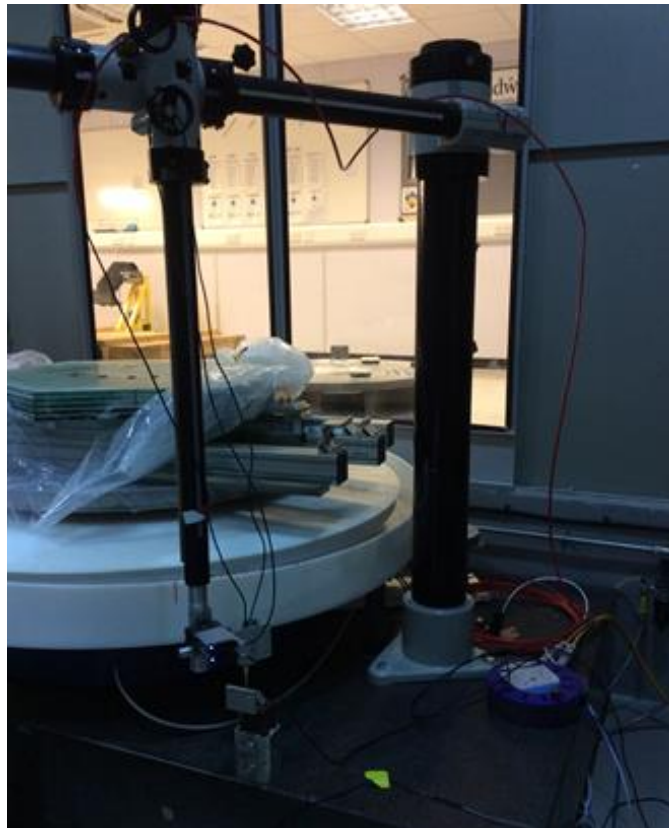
Metrology Probe Mounted on Cast Iron Arm
